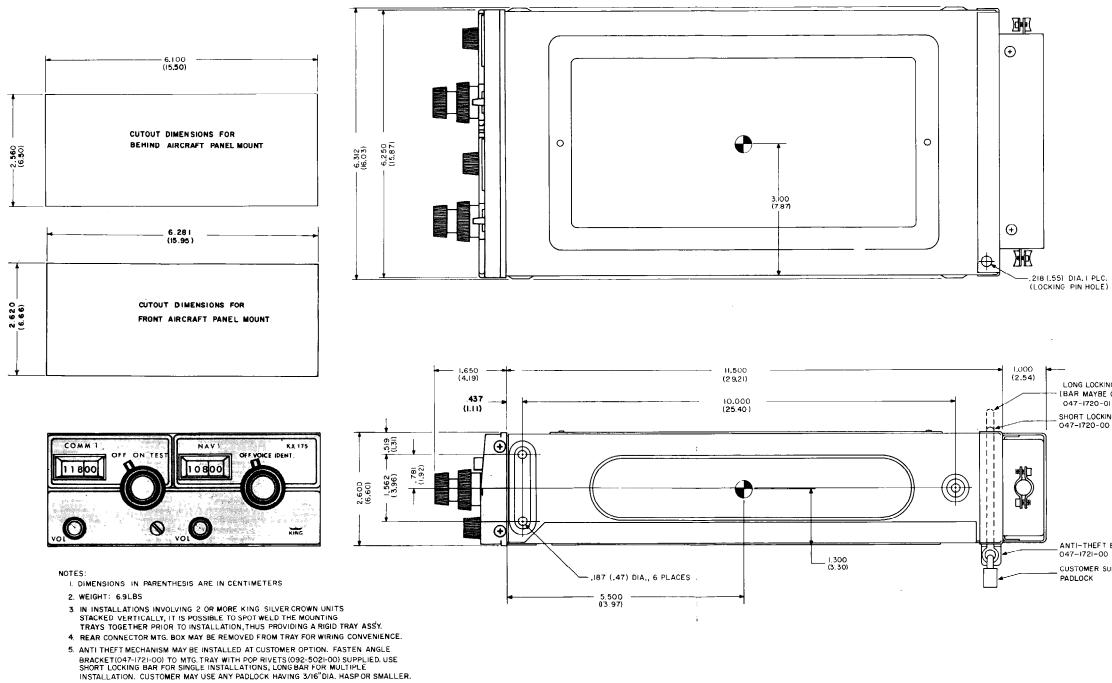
KX 170A/175 OUTLINE AND MOUNTING DRAWING
